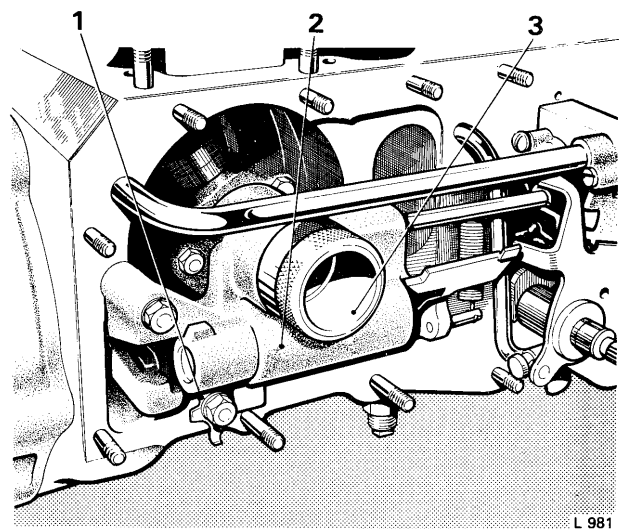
ALIGNING THE PARKING BRAKE BRACKET
